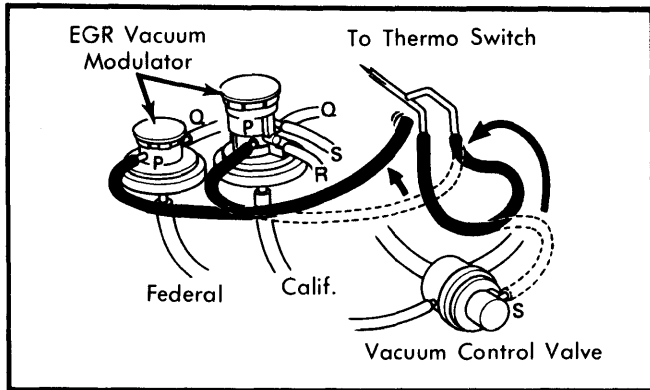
Land Cruiser Vacuum Hose Routing for Fast Idle Adjustment
